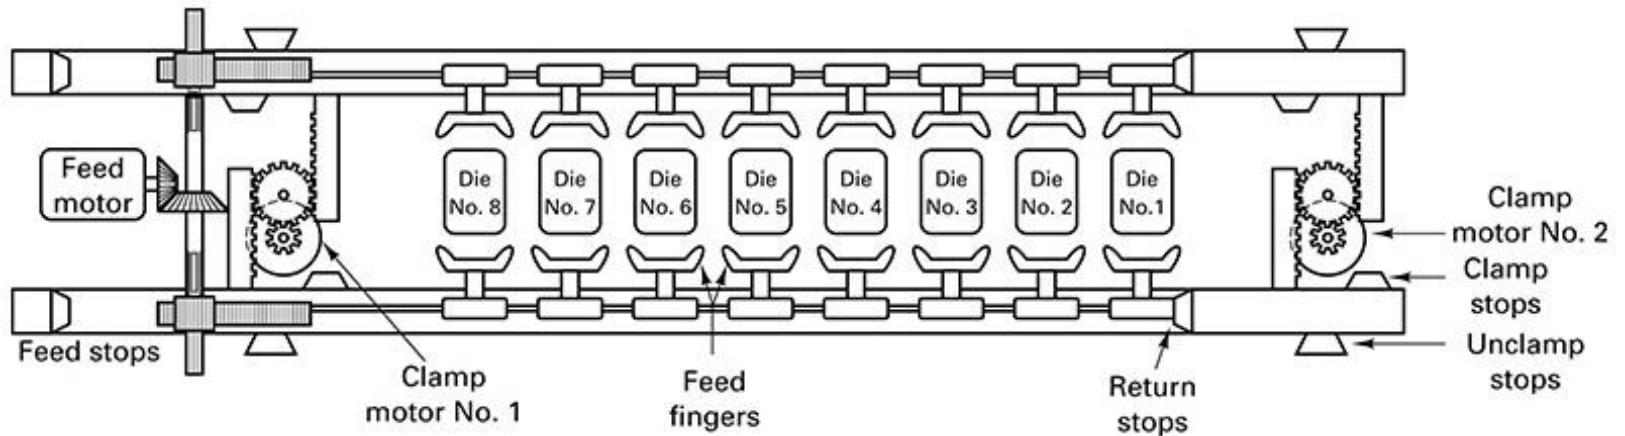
Schematic showing the arrangement of dies and the transfer mechanism used in transfer presses. (Courtesy of Verson Allsteel Press Company, Chicago, IL.)
